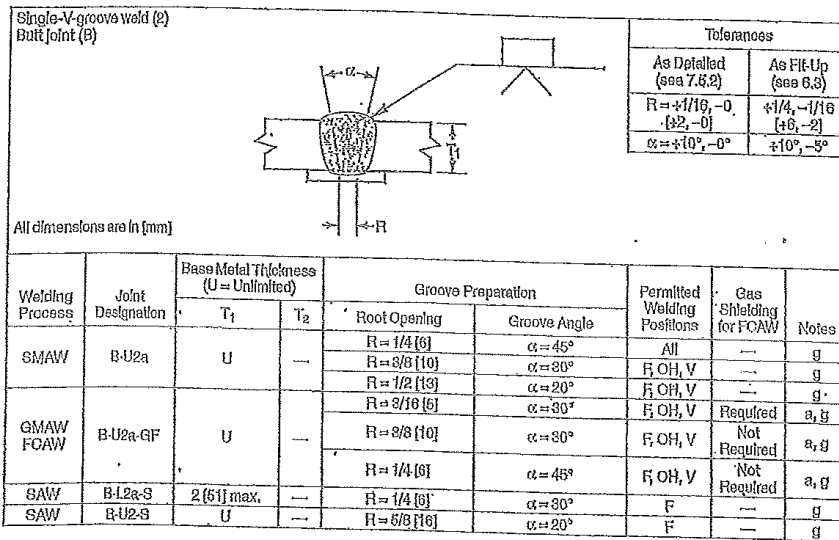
B—Prequalified Complete Joint Penetration (CJP) Groove Welded Joint Details
